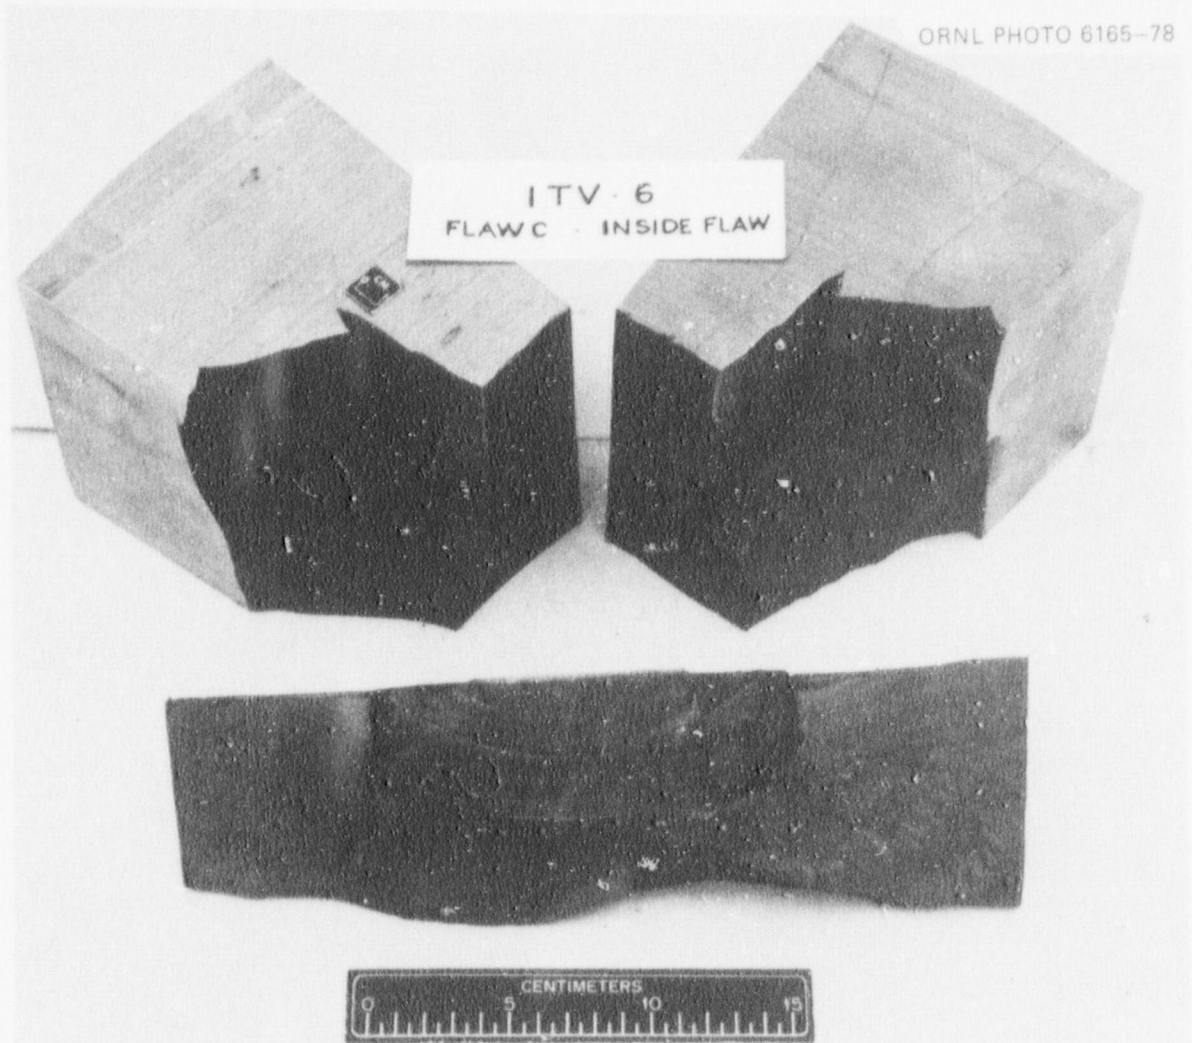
Fracture surfaces and flaw profile of flaw C from intermediate test vessel V-6.
